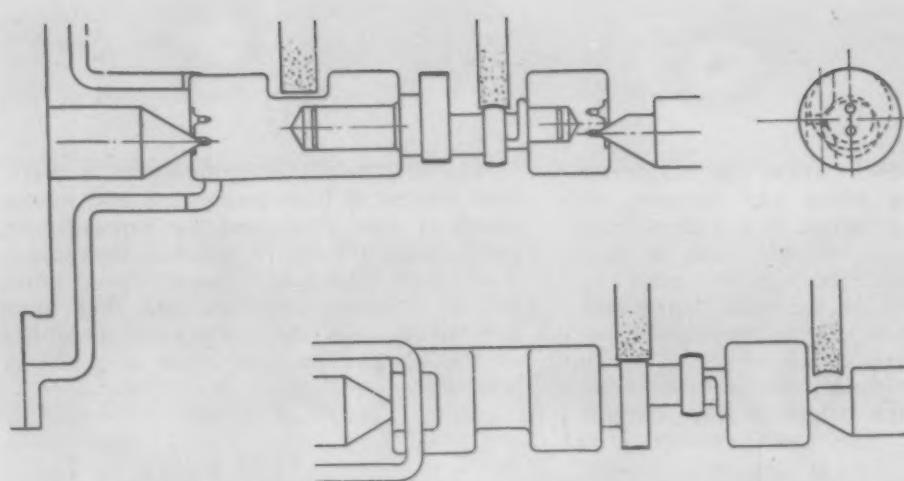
This eccentric shaft requires a pair of eccentric female centers for holding during grinding on a 4 x 12 in. plain grinder. (Courtesy: Landis Tool Co.)
